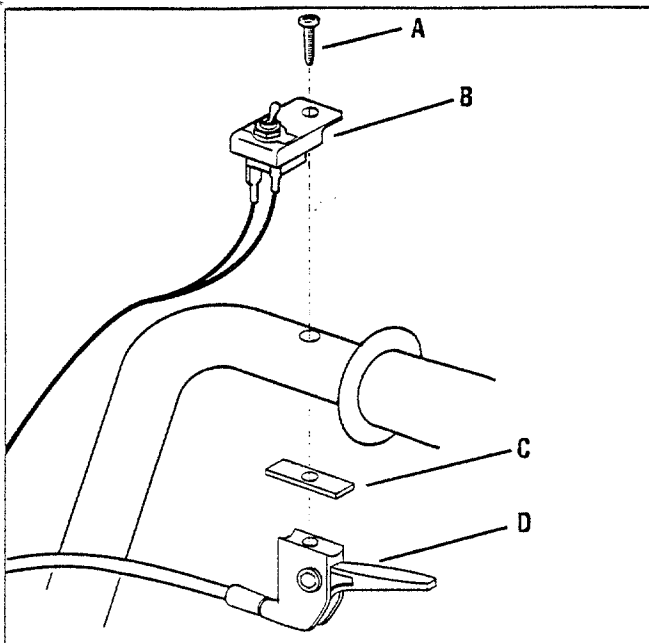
Installing Engine On/Off Switch (B) and Throttle Lever Assembly (D) to right handlebar.
